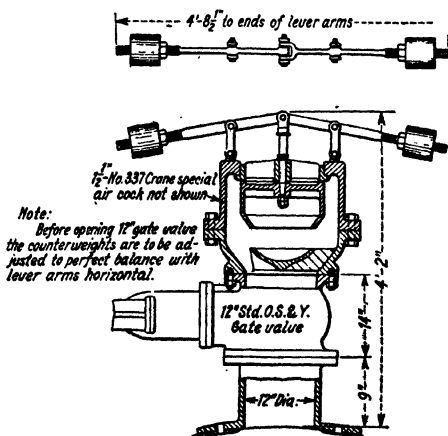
Assembly of 12-in.-Hawley Air Valve, Barrett Machine Co., Pittsburgh, Pa.
